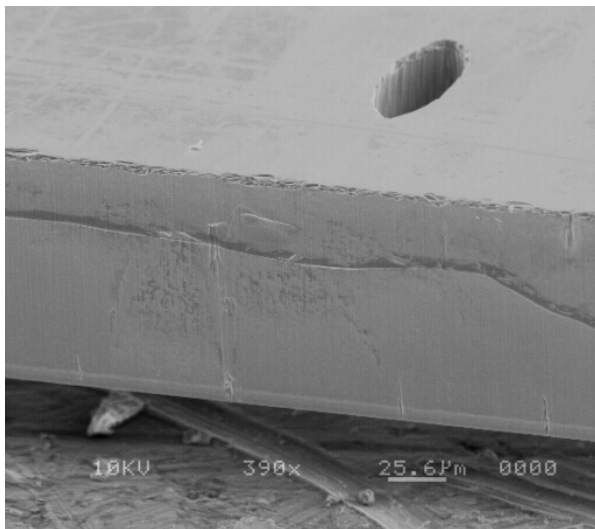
Ellipse specimen of Batch 7, showing chipping at bottom edge (top side is down).
